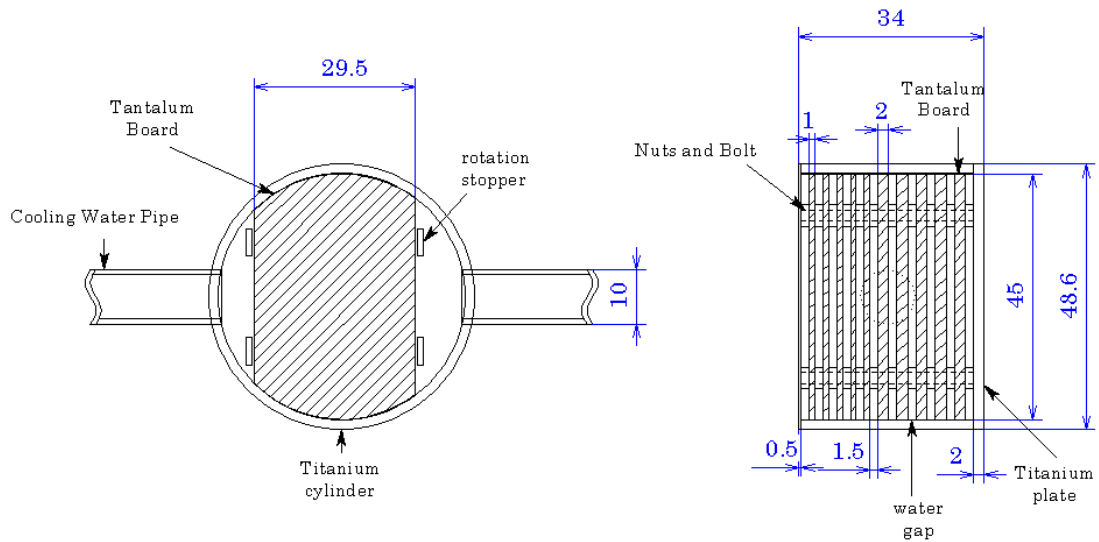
Front and side view of Cross section of the Ta 15 mm thick target.
